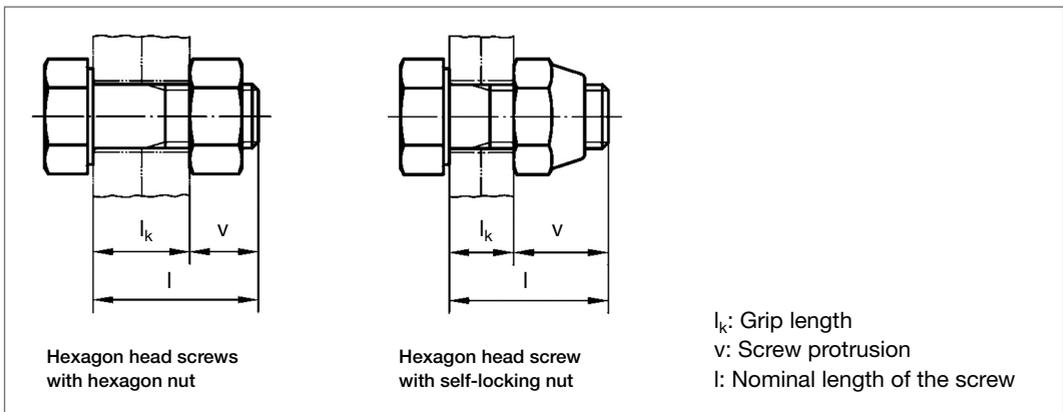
Bolt connection – screw protrusions according to DIN 78
